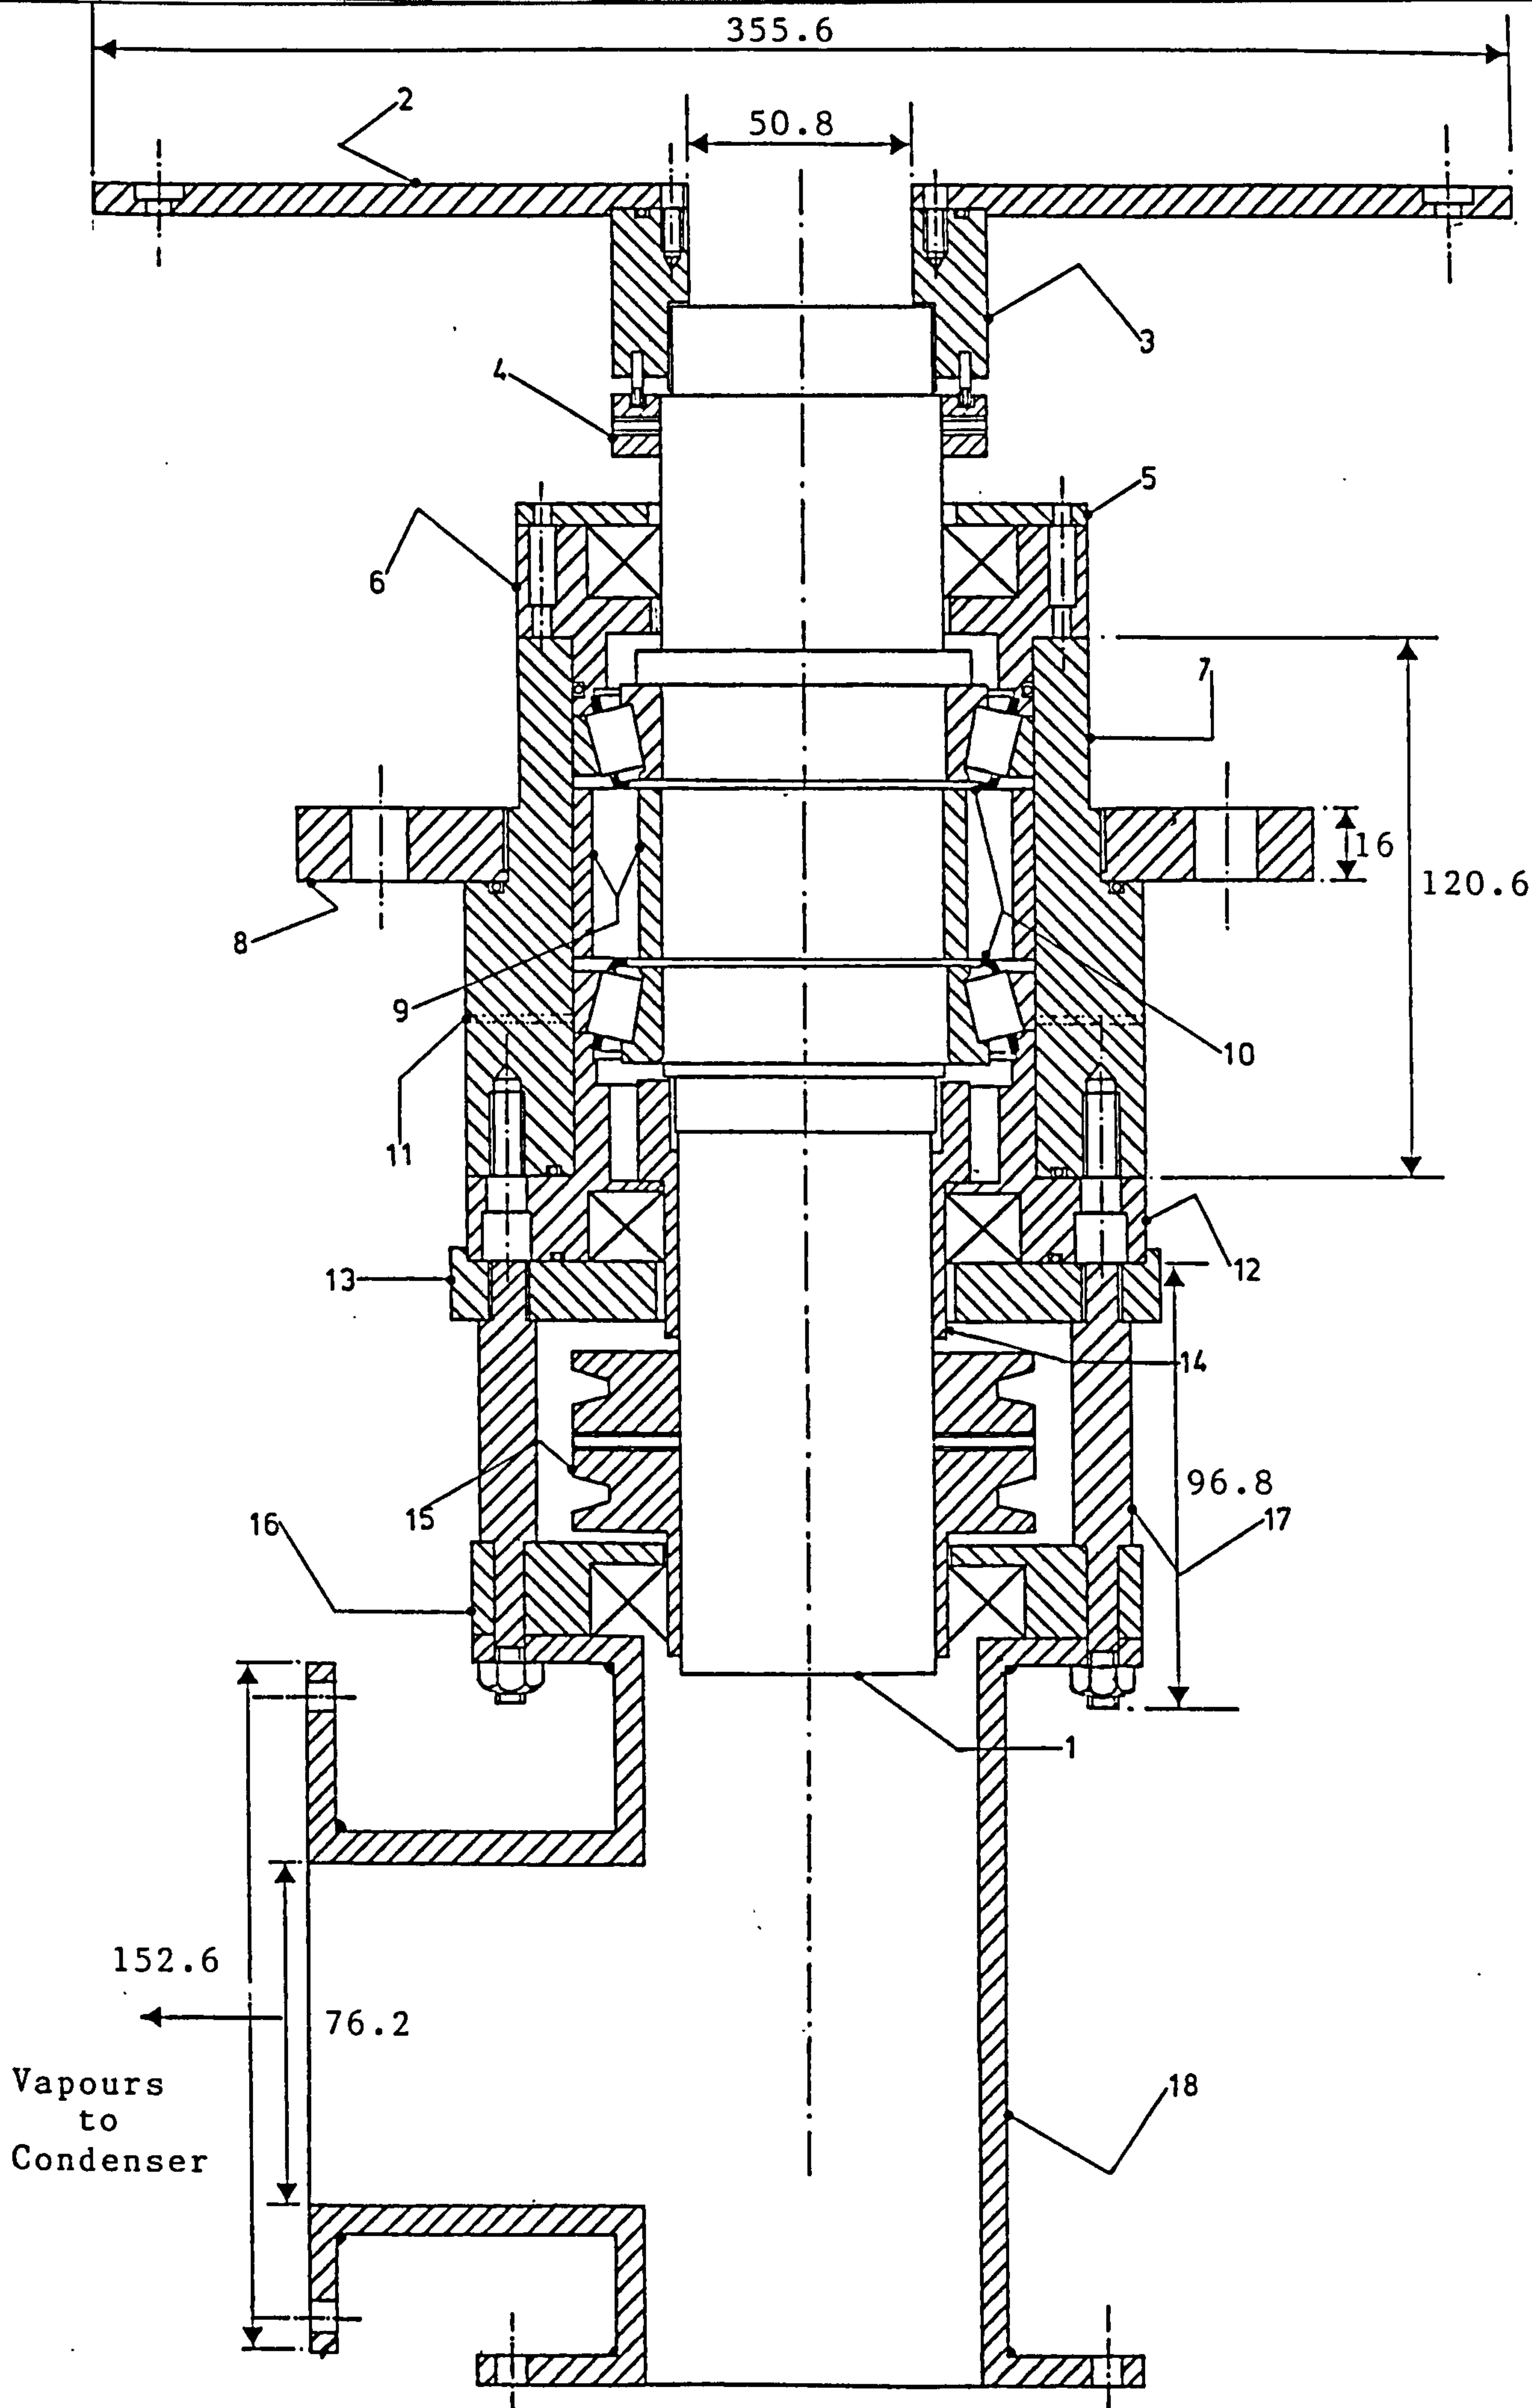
CROSS-SECTIONAL VIEW OF THE ROTOR ASSEMBLY
